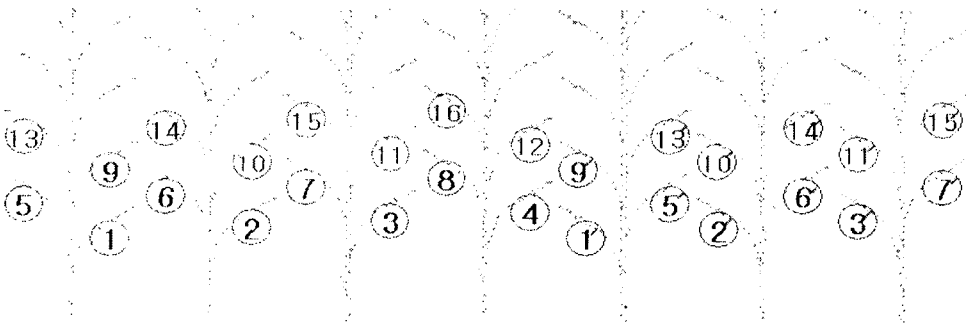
The pattern and order of rotary blades of cutting soil-surface
